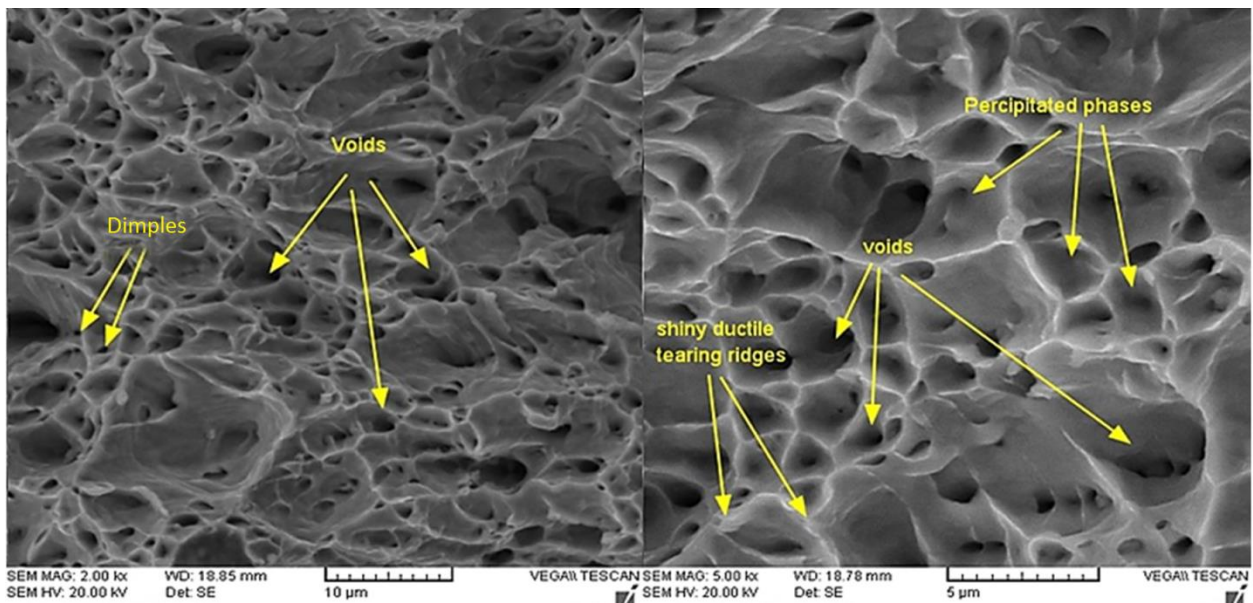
Fracture surface of the laser welded sample with high heat input.
